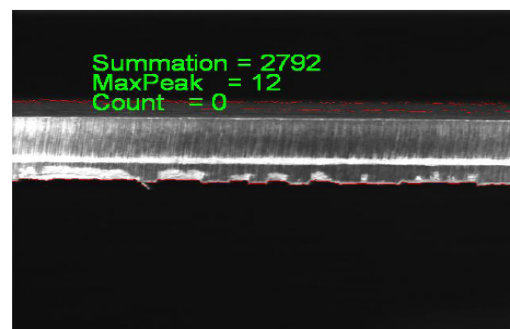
An example of strip cutting face causing defect of the saw ears after cold rolling.
